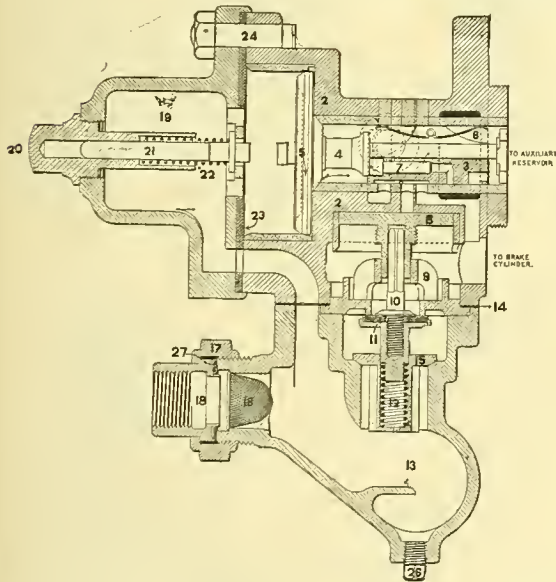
Sectional View of Quick Acting Passenger Triple-valve.
